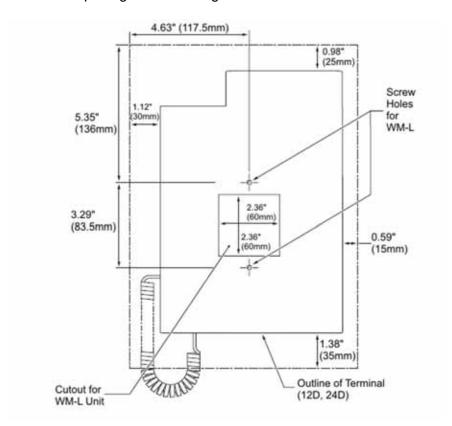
Wall Mount Spacing Guide (WM-L UNIT)
